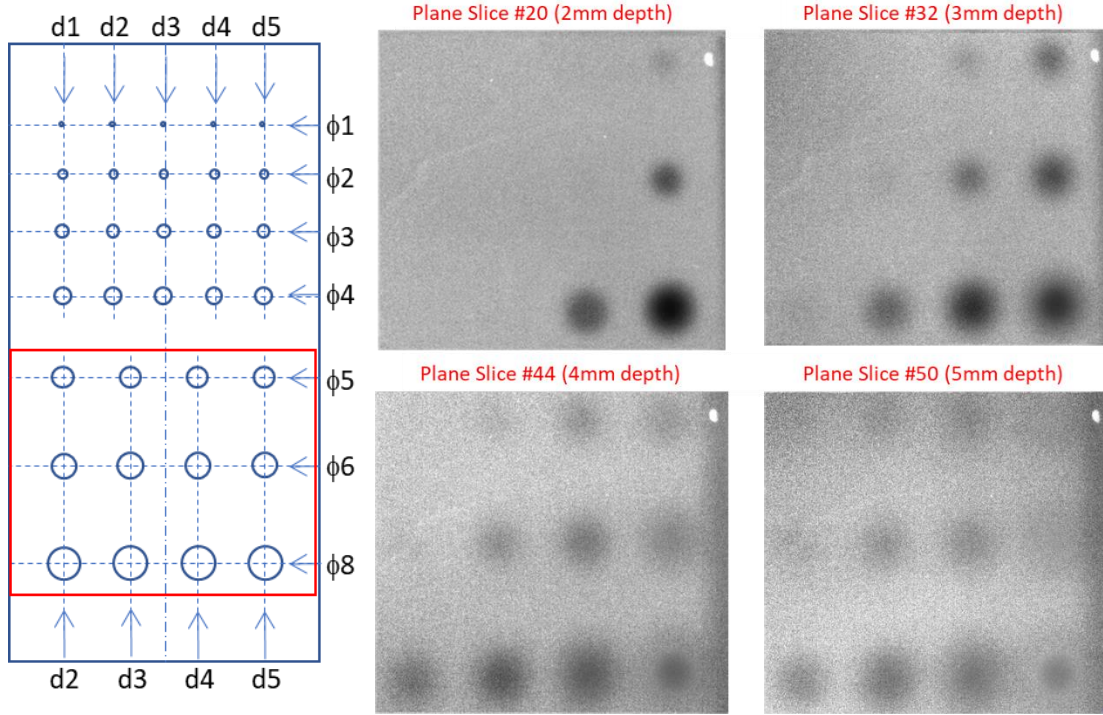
Imaging of internal imprinted defects in AM metallic plates
